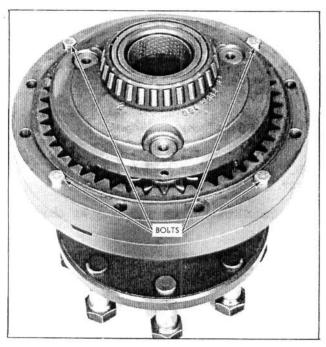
Axle Planetary with Ring Gear Attached for Pre-Load Adjustment
